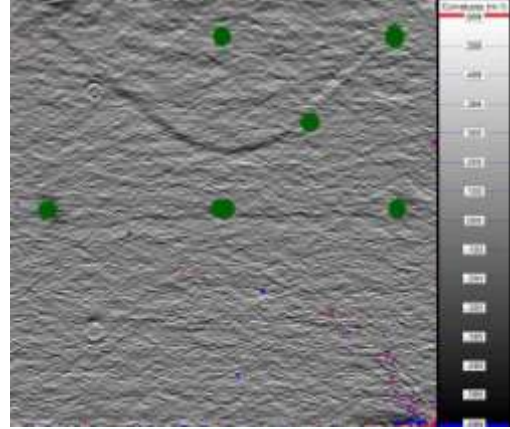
A Painted Assembly Built using an In-Mold Coated 1.89 g/cc Outer Panel.
